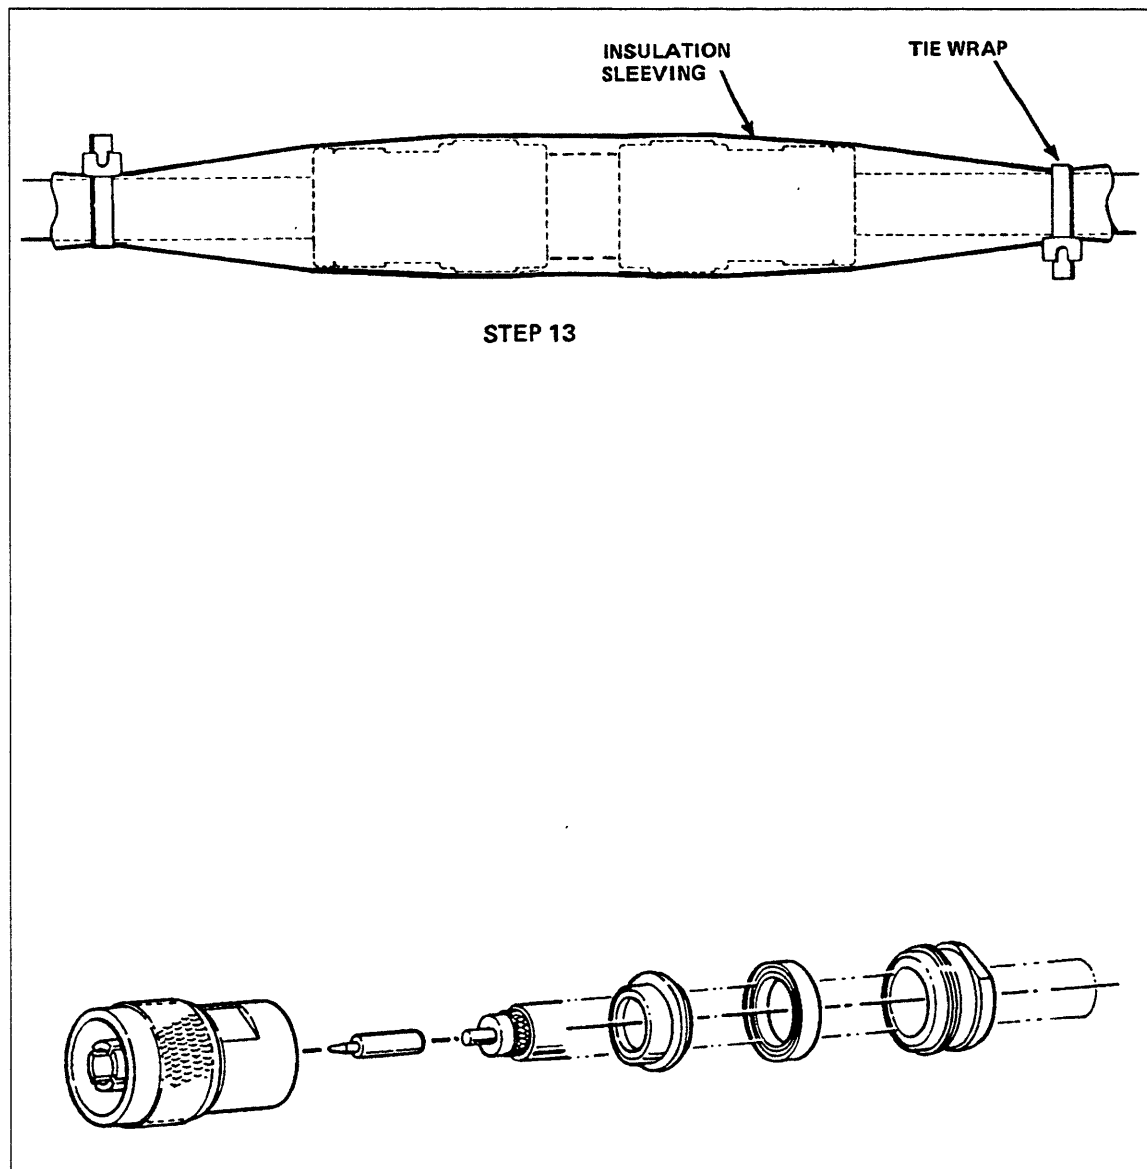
Installing a Solder-Type N-Connector Part 2
